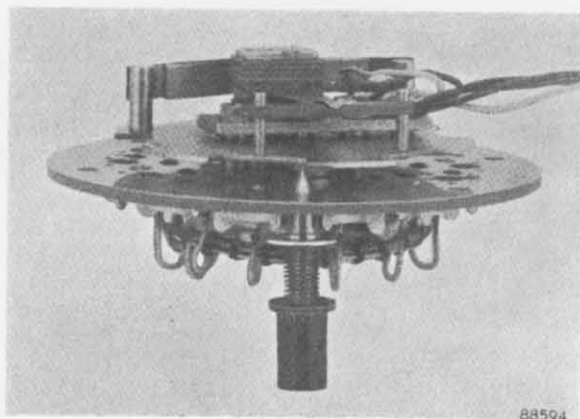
Side view of keyset mounting plate. One key plunger and the interlocking disk are shown in the unoperated position. The operating spring of the start contact *vc* rests in a hollow in a cross-piece of insulating material mounted on the interlocking disk.
